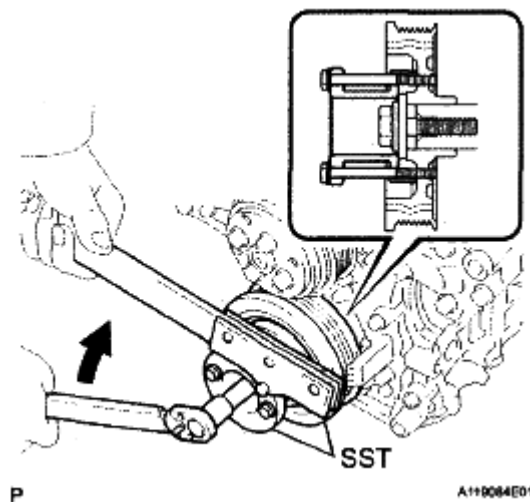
Using SST To Install Crankshaft Pulley Bolt
